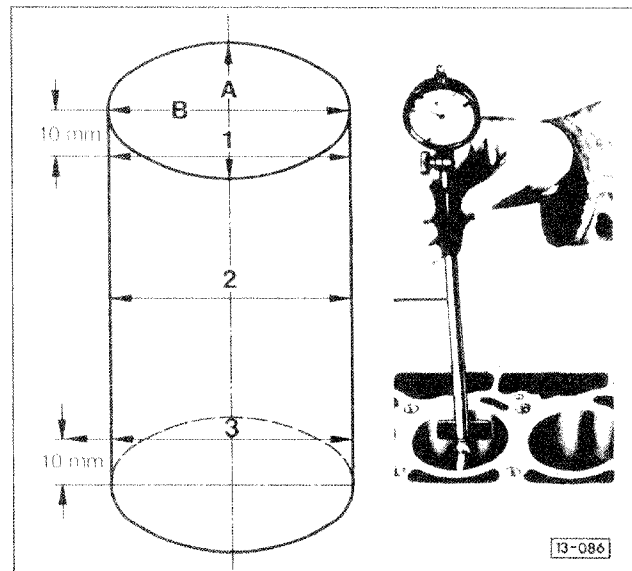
Cylinder bore measuring points. Top 1 and bottom 3 measurements should be made at least 10 mm (3/8 in.) from ends of cylinder, first in direction A and then in direction B.
